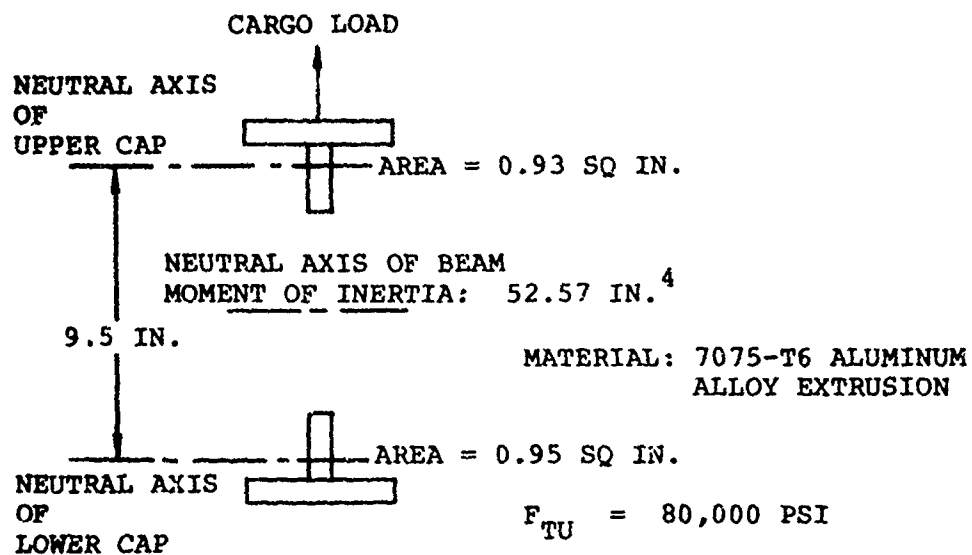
CH-47 Floor Frame Cross Section Depicting Upper and Lower Caps.
